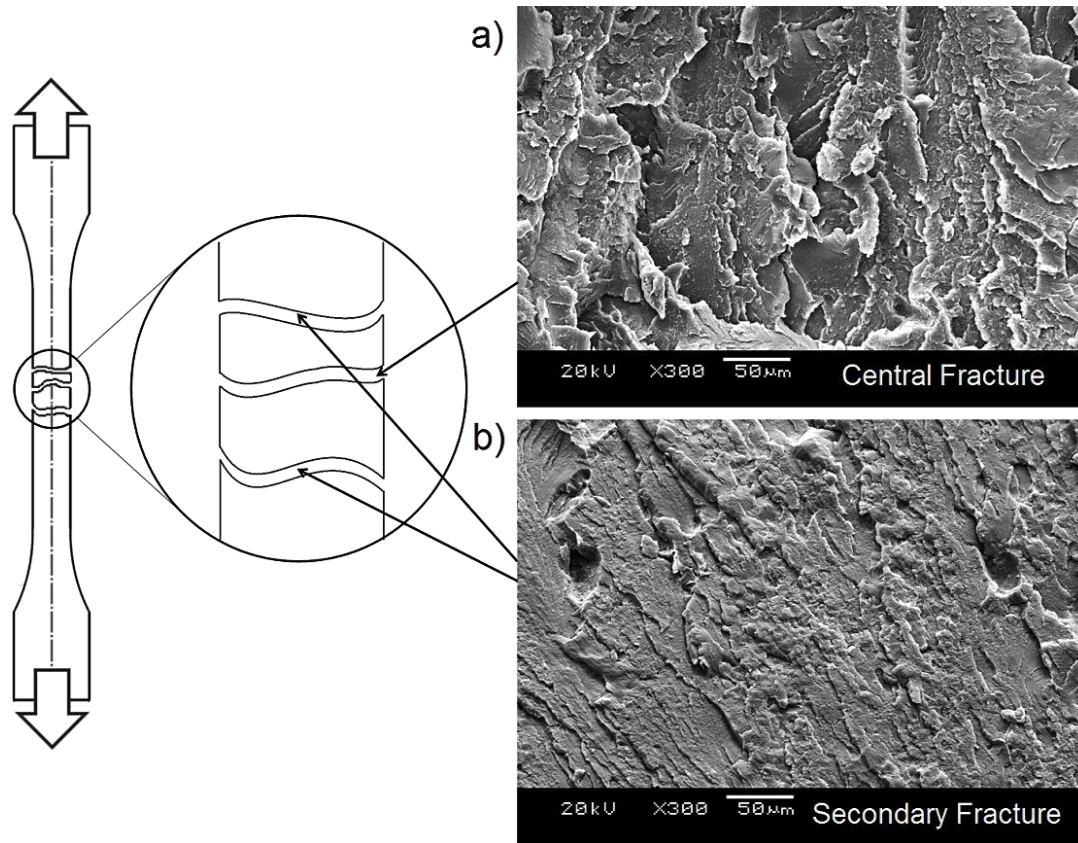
Fracture surfaces from tensile testing; a) central fracture, b) secondary fracture
